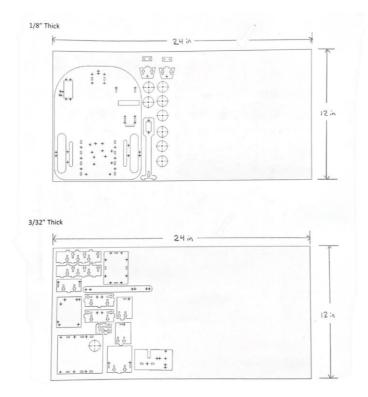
SolidWorks Layout of All Laser Cut pieces for Milestone 3
